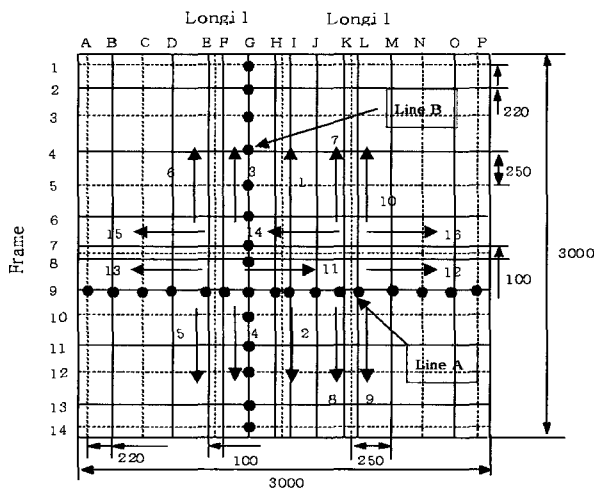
Measurement point and welding sequence in mock-up specimen
